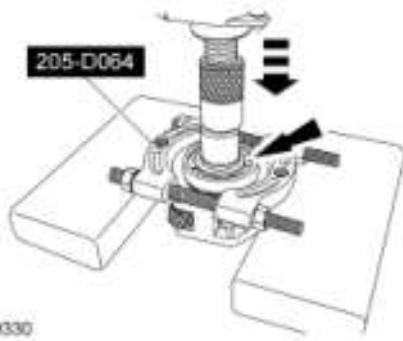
Removing Planetary Gear Carrier Support Bearing Using Press And Special Tool
